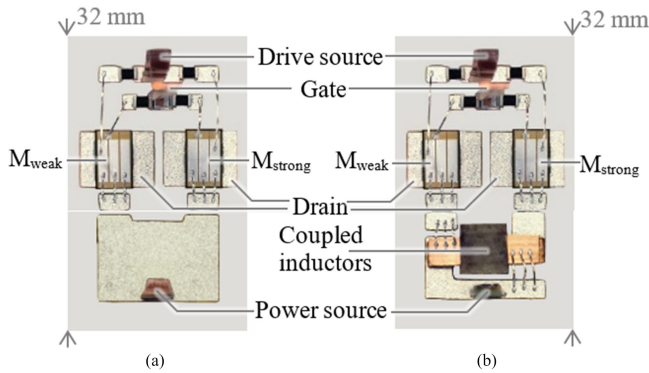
Fabricated (a) baseline module without magnetics and (b) module with integrated coupled inductors. Their schematics and layout designs are shown in Figs. 1 and 5, respectively. The materials and thickness of the component of the module are shown in Table I. The dimensions of the coupled inductors are shown in Fig. 3(a).
